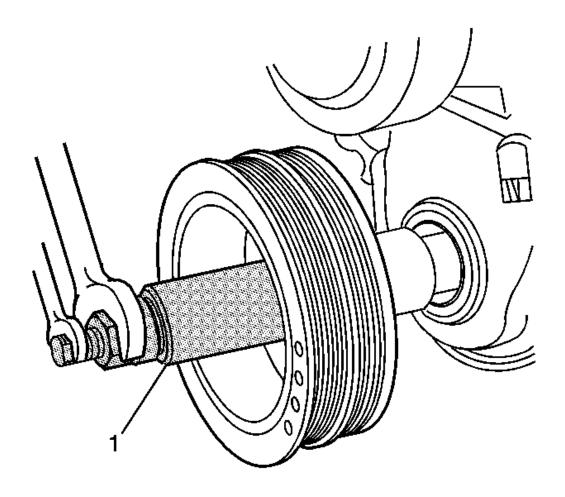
Installing Crankshaft Balancer Using J 42845 Courtesy of GENERAL MOTORS CORP.
